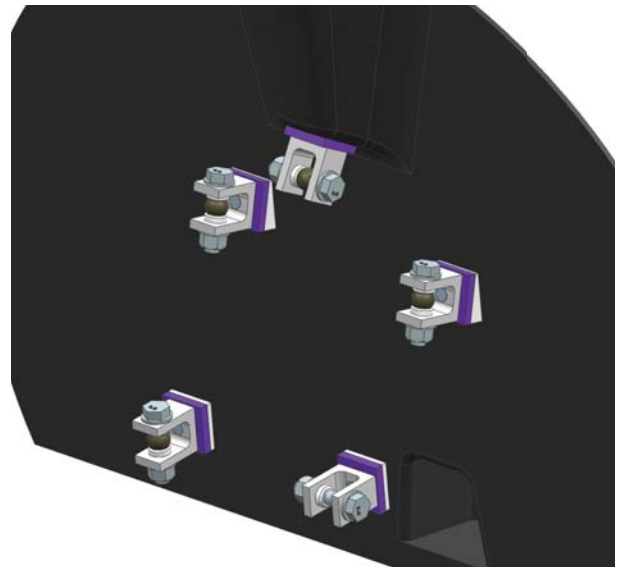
Clevises attached to wheel well using wedges and bushings
